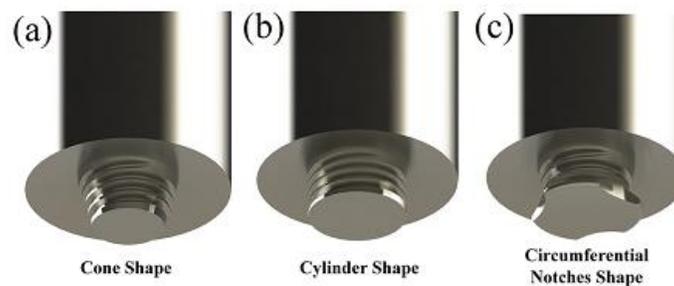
Illustration of three designed probe geometries: (a) cone shape, (b) cylinder shape & (c) circumferential notches shape
